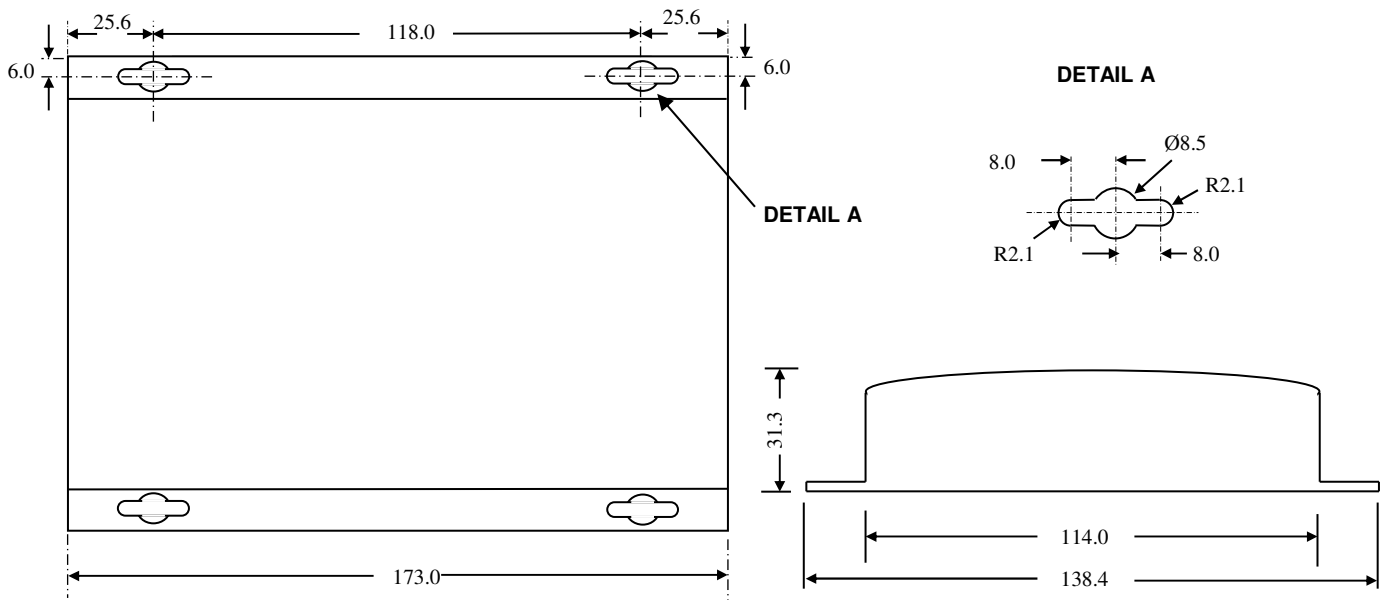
OSD2175MP/240VAC MOUNTING DIMENSIONS
